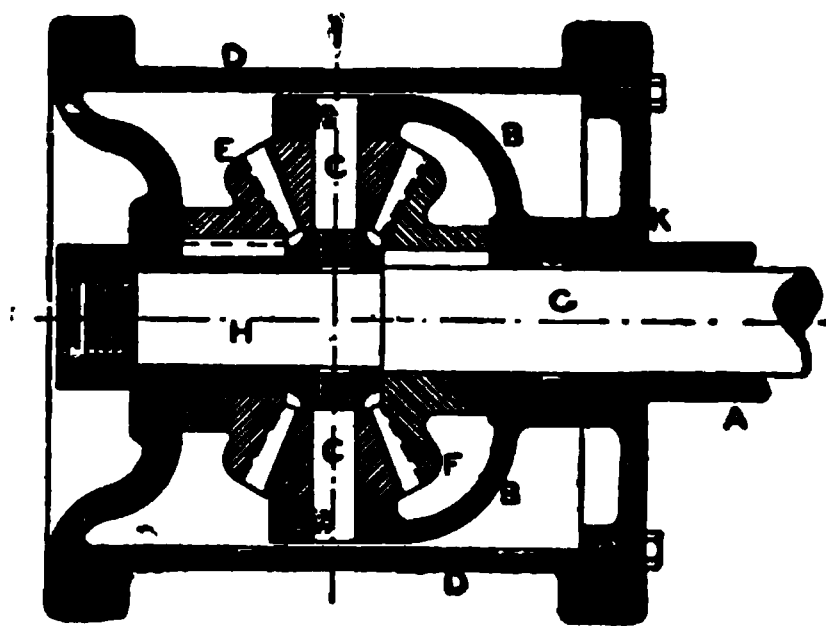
The Hub-Enclosed Differential of the Riker Carriages. A is the rotating sleeve carrying the drive spur. It is bolted to the yoke carrier, B, and the flange piece, K, as shown. C and C are the studs of the bevel pinions attached to the yoke carrier, B. F is the bevel gear wheel keyed to the rotating through axle shaft, G, whose opposite end is rigidly attached to the other hub. The bevel gear, E, is keyed to the in-flanged portion of the hub, D, turning on the reduced portion, H, of the rotating axle shaft.
